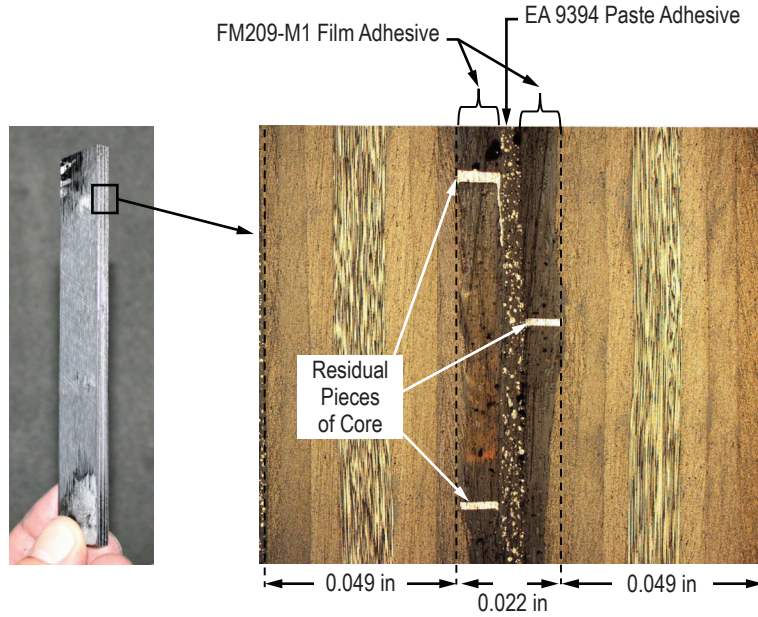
Photograph of CLC test specimen made from two facesheets with core removed and closeup of edge.
